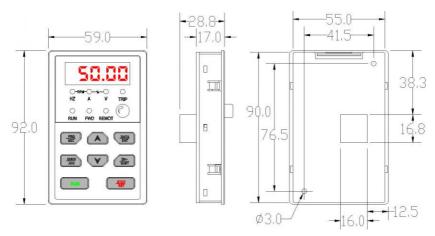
Little keyboard dimension(0.7~2.2KW) (mm)
